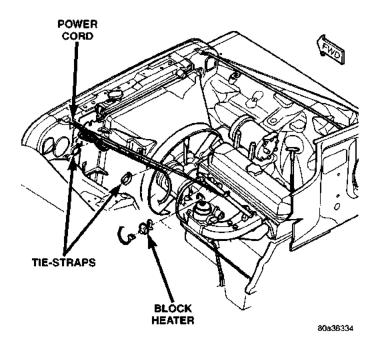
Block Heater and Cord—2.5L Engine FAN
